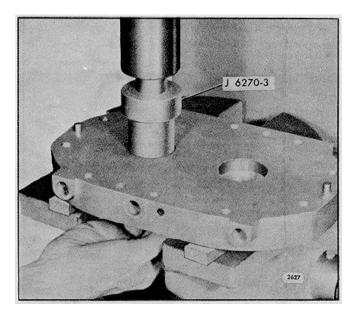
Removing Oil Seal (or Oil Seal Ring Collar) and Bearing from End Plate
